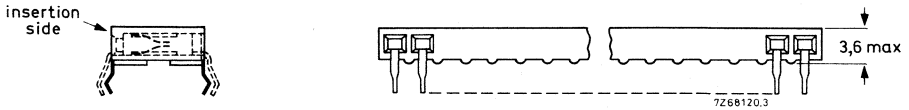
Board edge socket, single row. Dimensions are identical with those in Fig. 3, except as shown.
